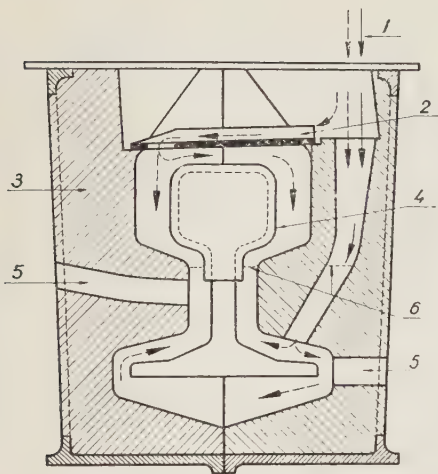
Thermit-pressure weld with plate
